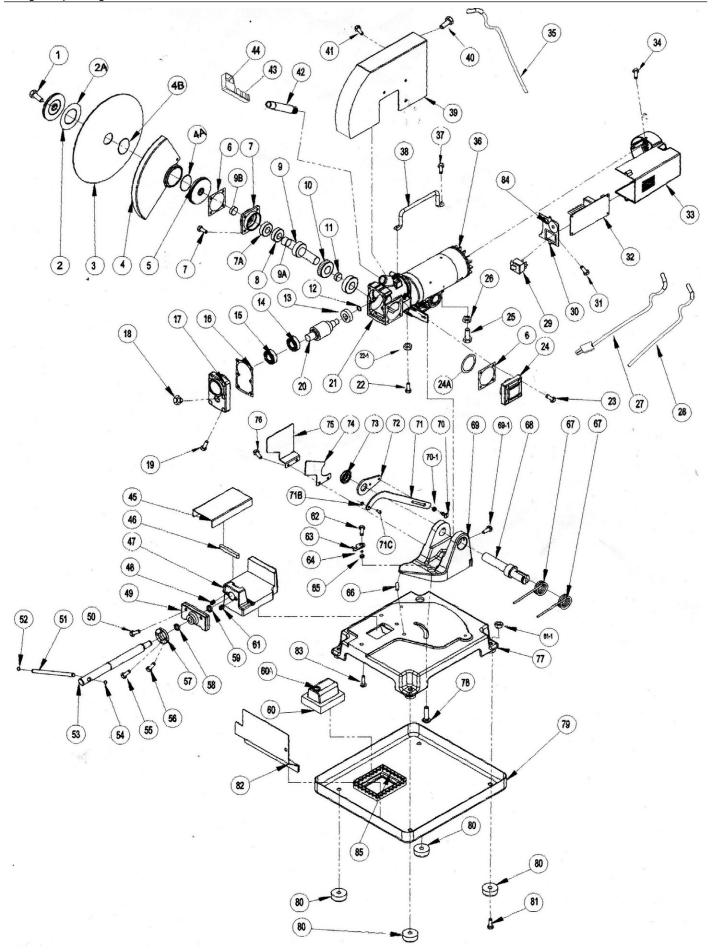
Replacement Parts Illustration for 9" Bench Top Cold Saw
